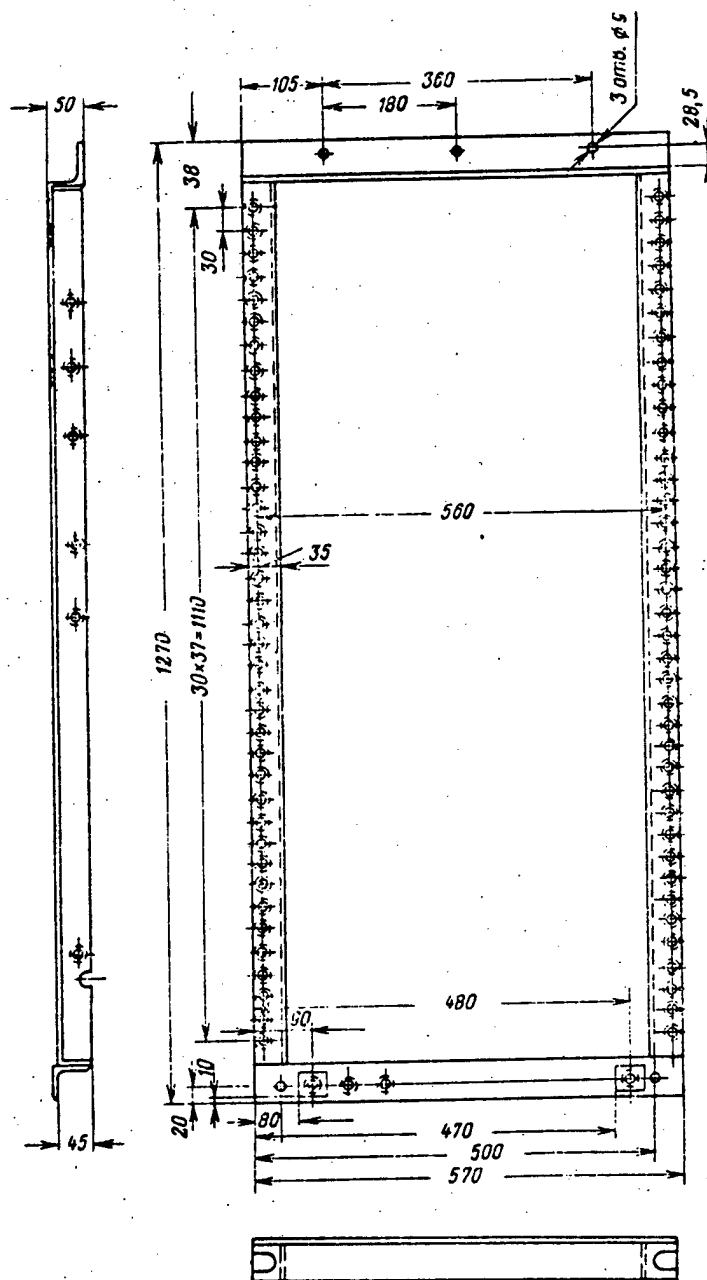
The rack frame of the SPU-N-U equipment (lower part).
